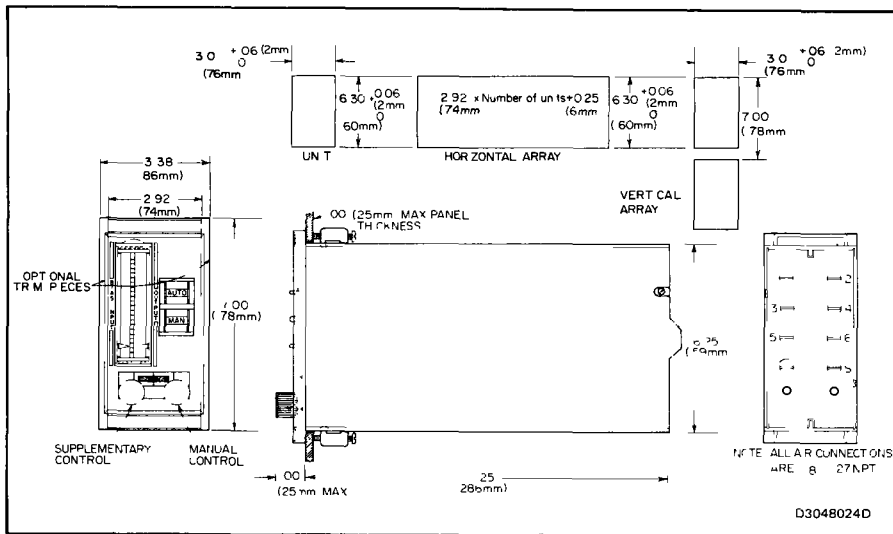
External and Mounting Dimensions, Manual/Automatic Transfer Station, Type FT
